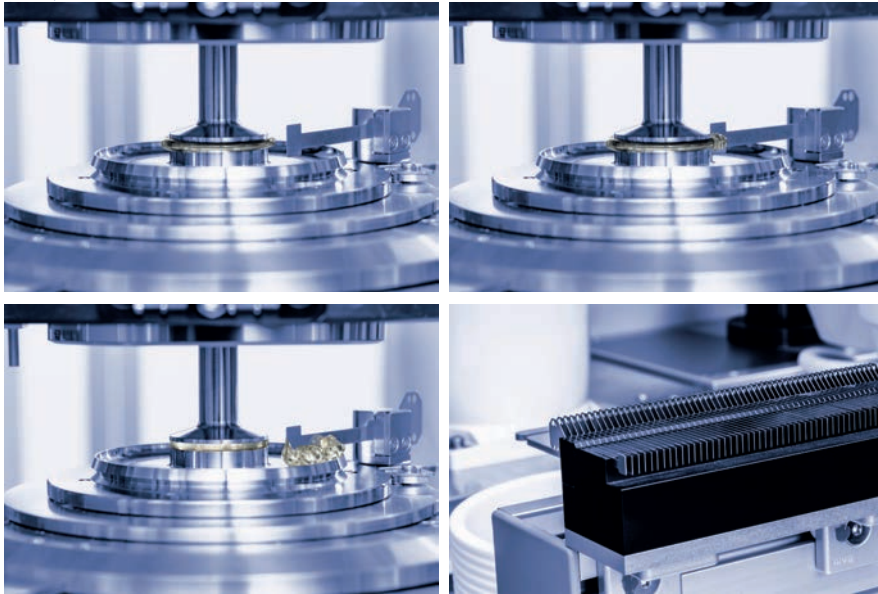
Blade of the trimming tool before, during and after the trimming process; and blade rack with disposable blades.
